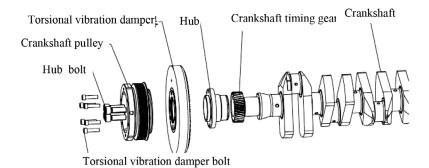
Exploded view of torsional vibration damper, pulley and hub
